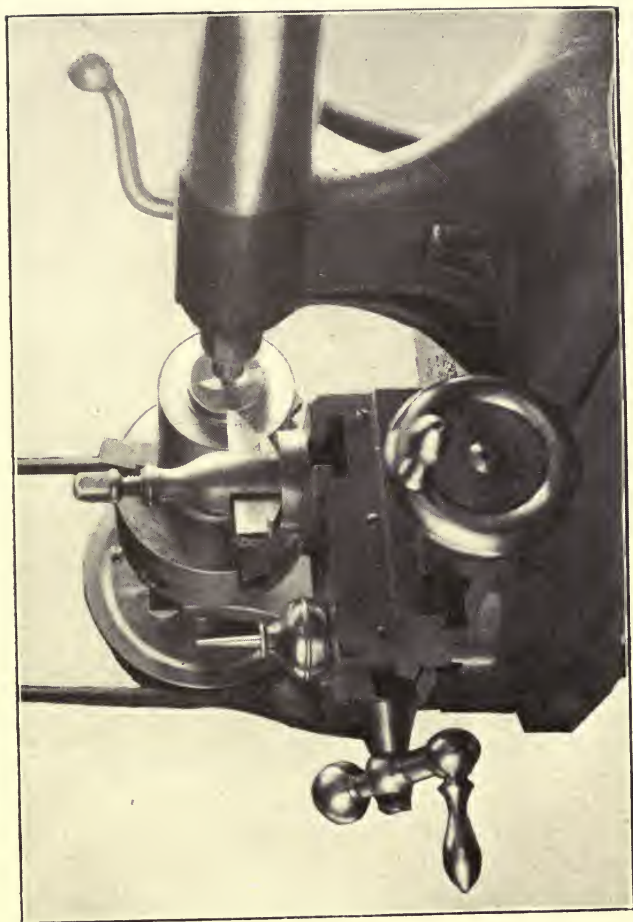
REMOVING CHUCK PIECE FROM PISTON CASTING.
